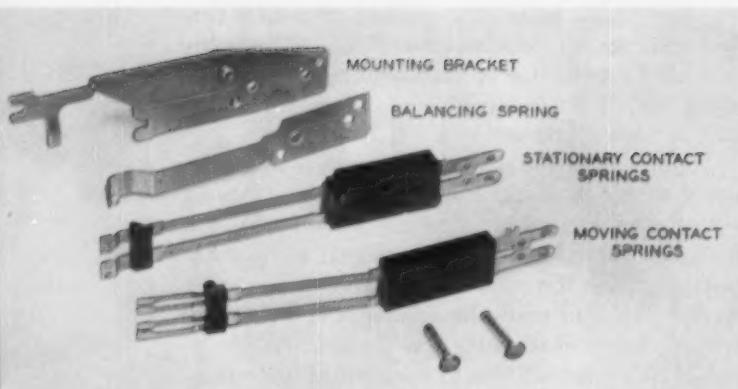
Exploded view showing the various components of a holding off-normal contact spring assembly.
